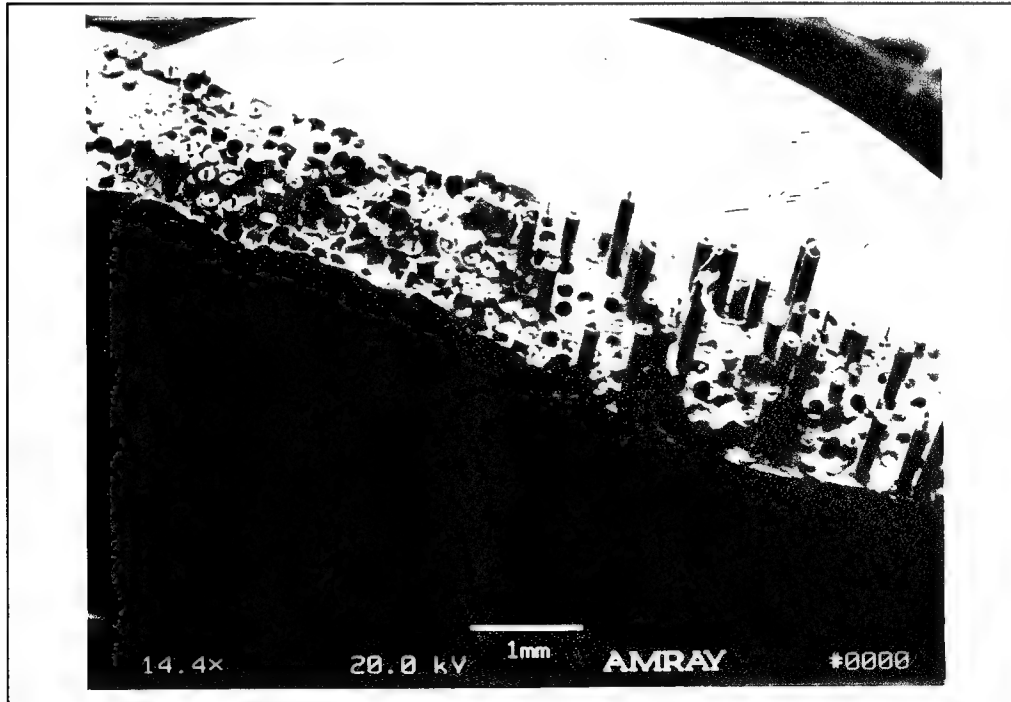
Fracture Surface at 700 MPa, TC HT
